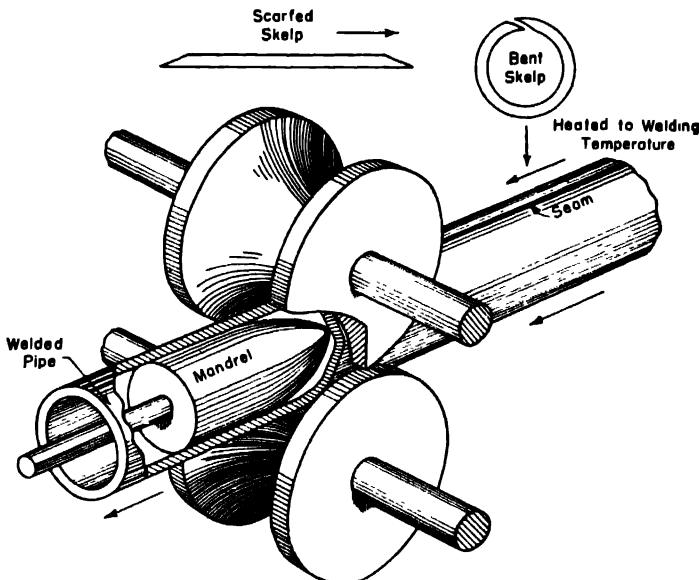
Lap welding by rolling seam over mandrel.
